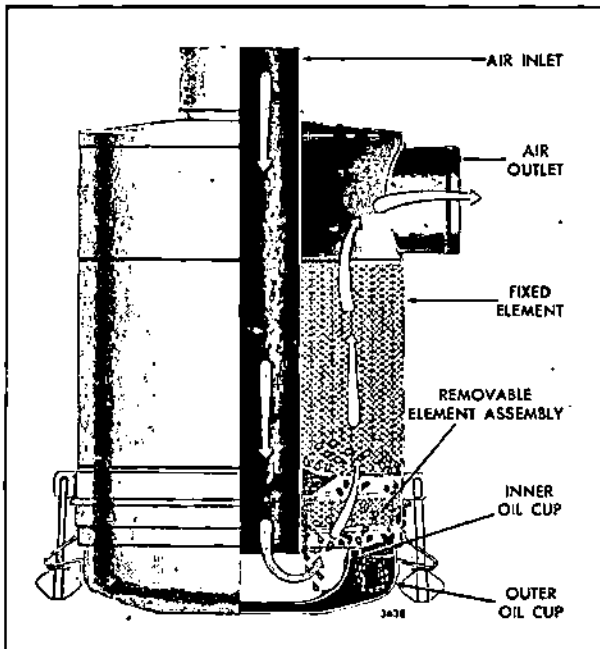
Heavy Duty Oil Bath Air Cleaner Assembly
